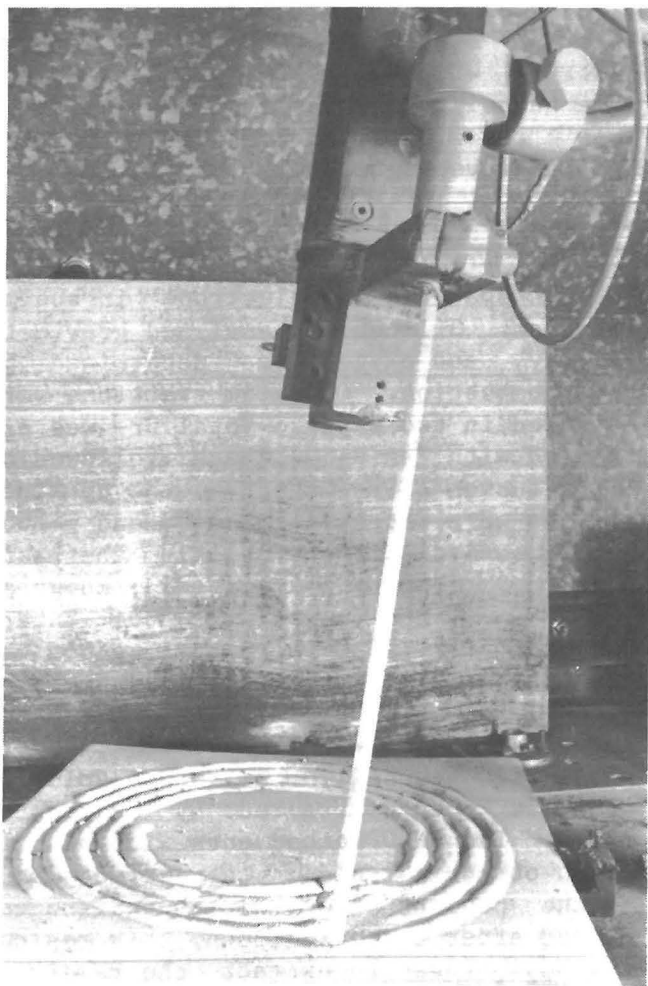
Welding electrode positioned in automatic feed system installed in chamber. Weld beads on the mild-steel plate are produced by rotation of the plate under the electrode.
